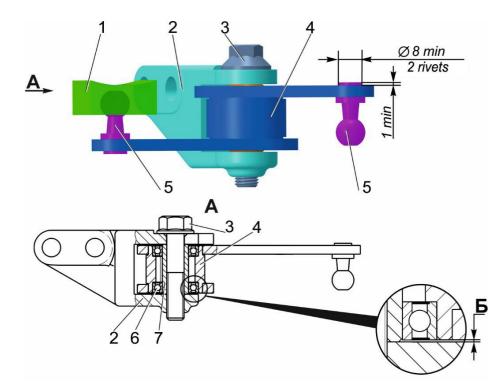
Selection lever with support: 1 – slider; 2 – support; 3 – bolt; 4 – selection lever; 5 – ball pins; 6 – radial ball bearing; 7 – bushing.
